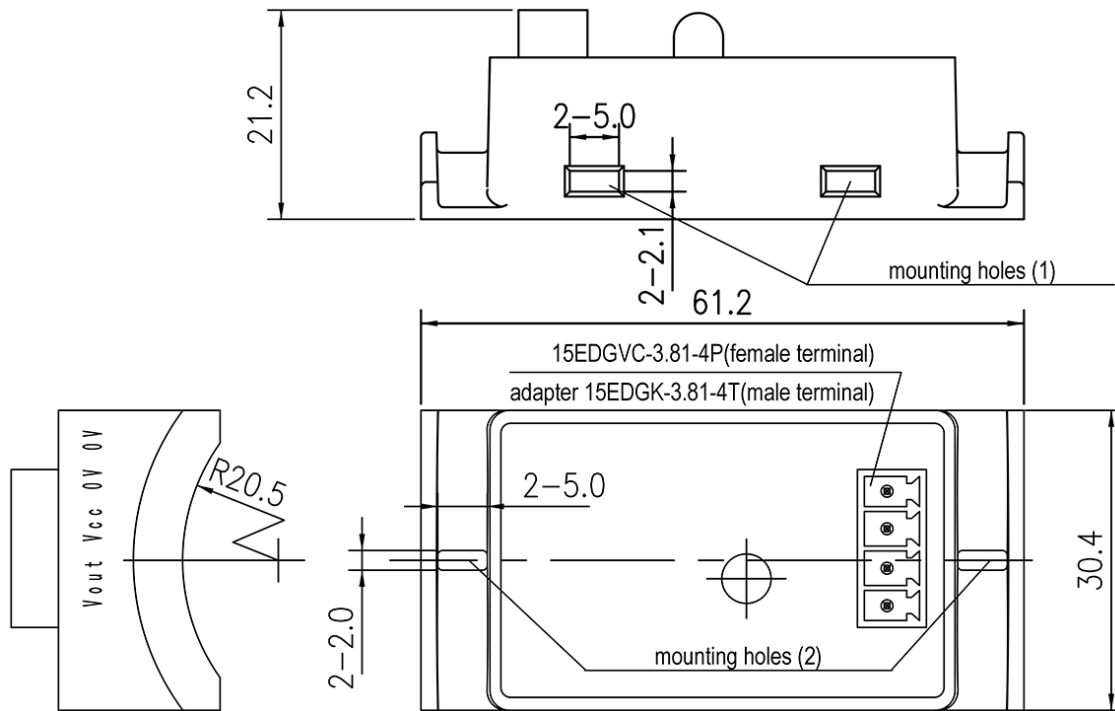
Sensor outline (unit: mm, tolerances for unmarked scales ± 1 mm)
